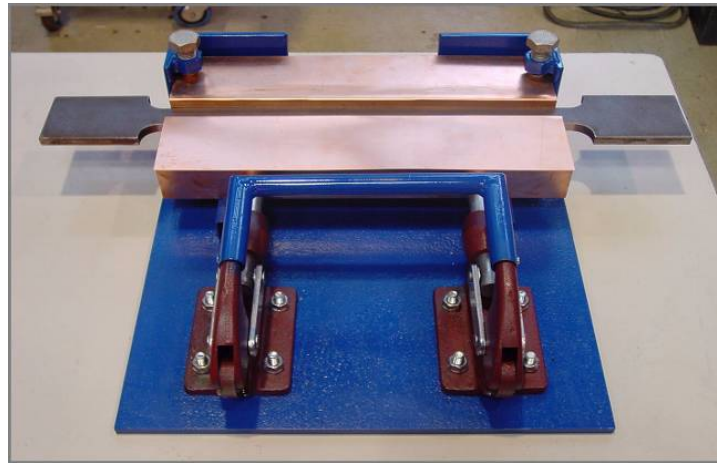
The gauge length (410mm) of the reduced tensile specimen was similar to the length of the welding fixture used during diffusible hydrogen analysis.
